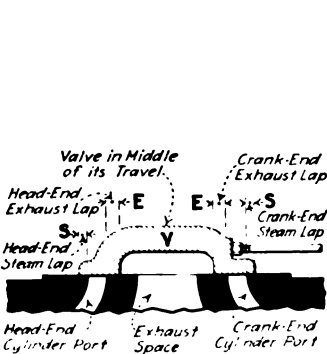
Outside-admission (D-slide) valve showing lap.
